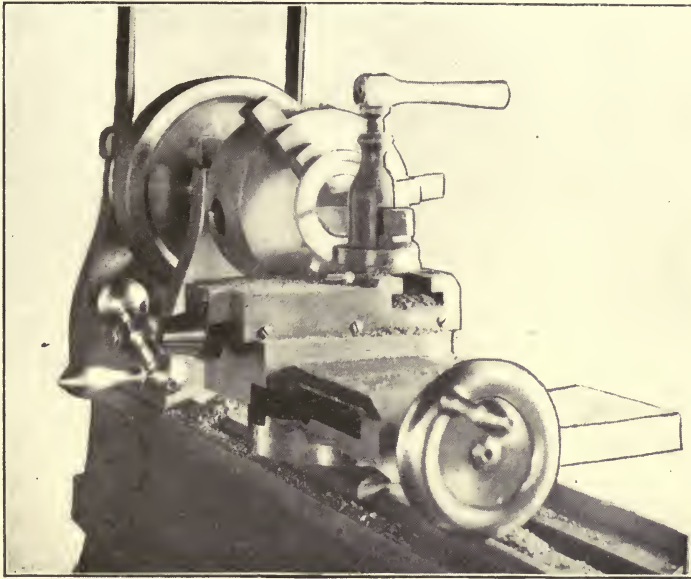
FINISHING OUTSIDE OF PISTON PACKING RING.
